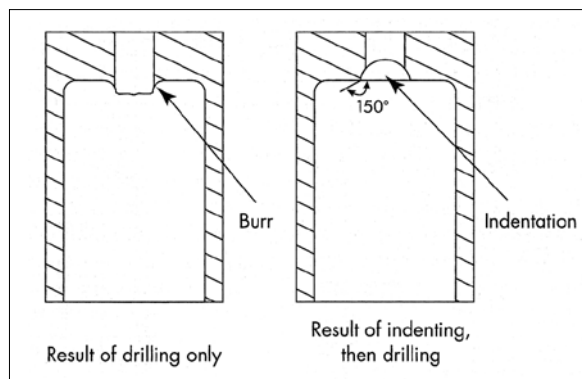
A ball indenter prevents a drill-exit burr from forming.
